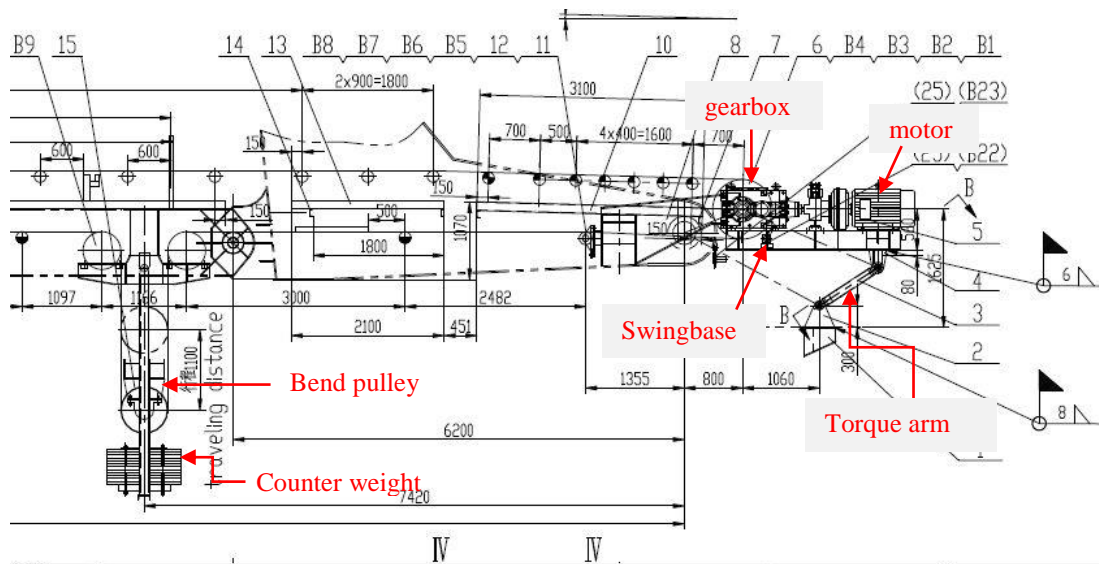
Detail drawing of the Conveyor driving unit (CDU) and coal transporter
